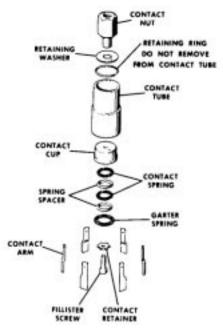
Stationary contact assembly components Reclosers above serial no. 1000
